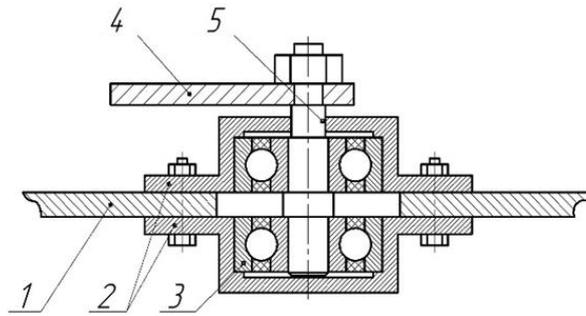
Section of bearing knot: 1 –filler; 2 –cover; 3 –bearing with AFF; 4 –holder; 5 –axis.
